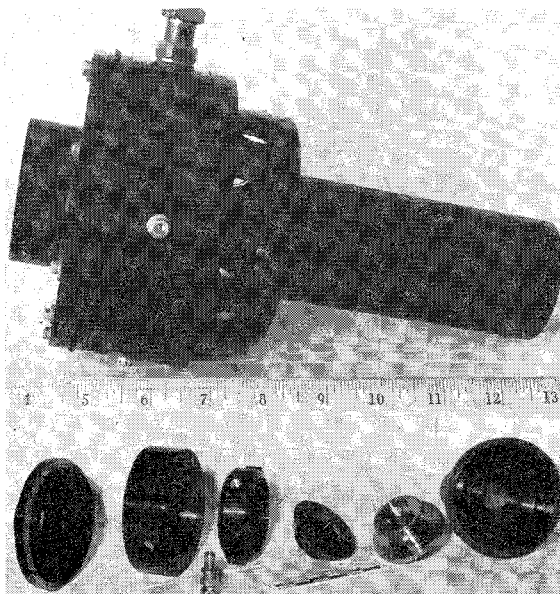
Hydraulic axisymmetric diverter assembly (upper) and exploded view (lower).
